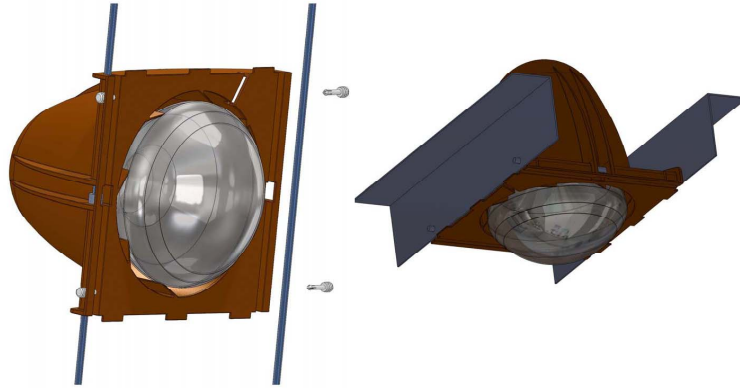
Two Housing Mounting Methods: Left figure shows a wall mounted PA. Right figure shows a deck mounted PA.
